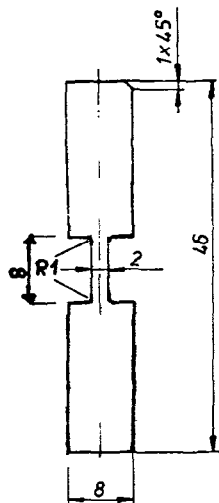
Geometry of specimens used for helium implantation (all dimensions in mm), thickness = 0.25 mm
